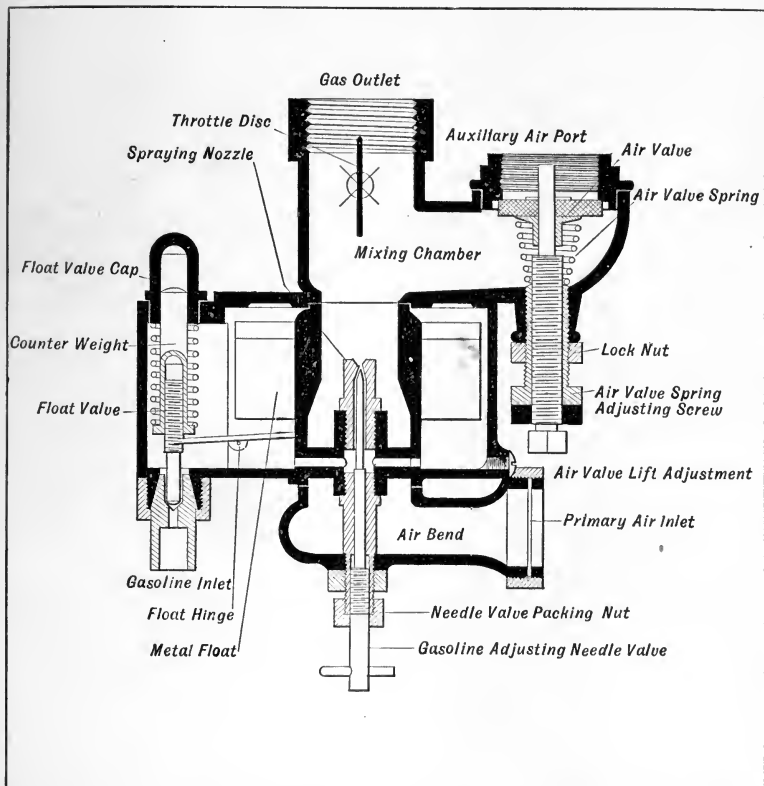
Holley Carburetor with Spring-Controlled Poppet Valve to Regulate Auxiliary Air Passage.
